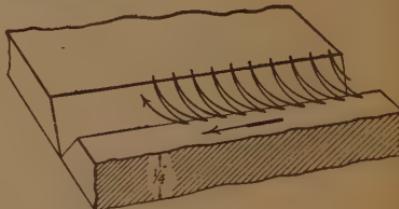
Oscillating Motion of Blowpipe for Welding Heavy Sections
